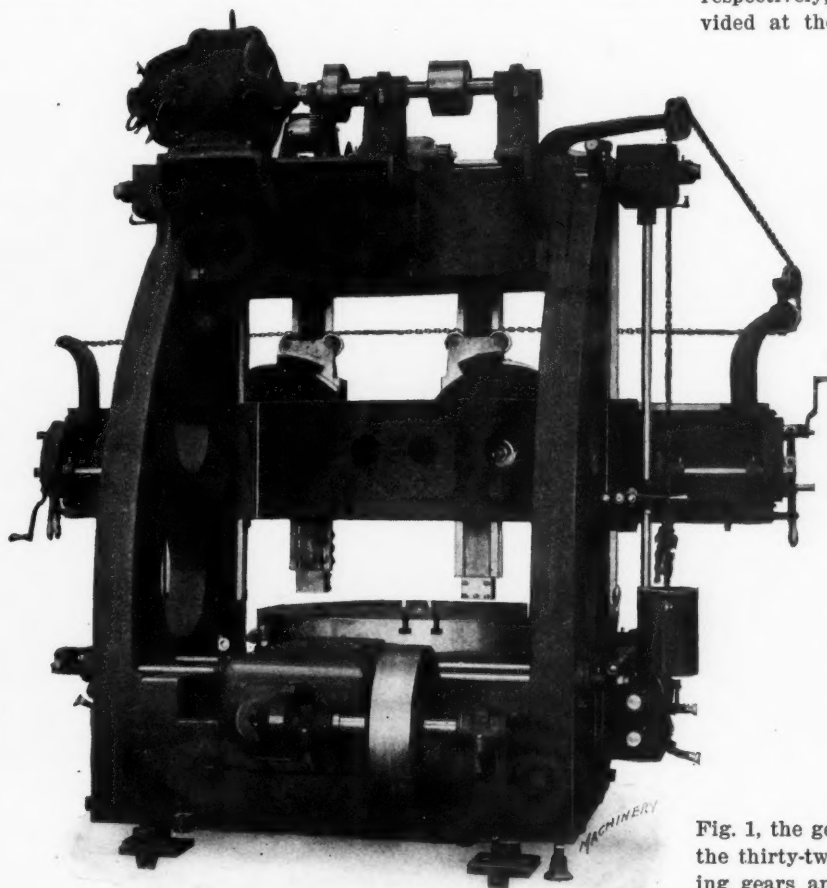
Opposite Side of Cincinnati Boring Mill showing Arrangement of Drive
